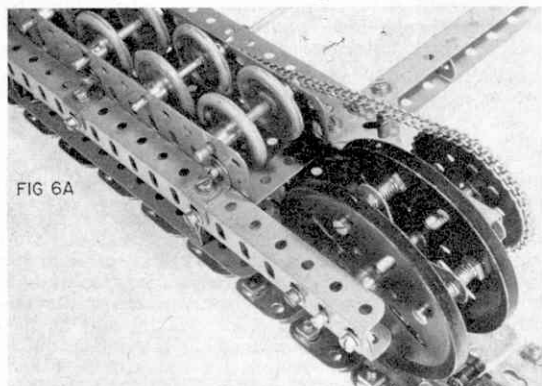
An underside view of the heavy-duty track frame showing support rollers and drive sprocket containing  $2\frac{1}{2}$  in. Strips used as driving "dogs."
